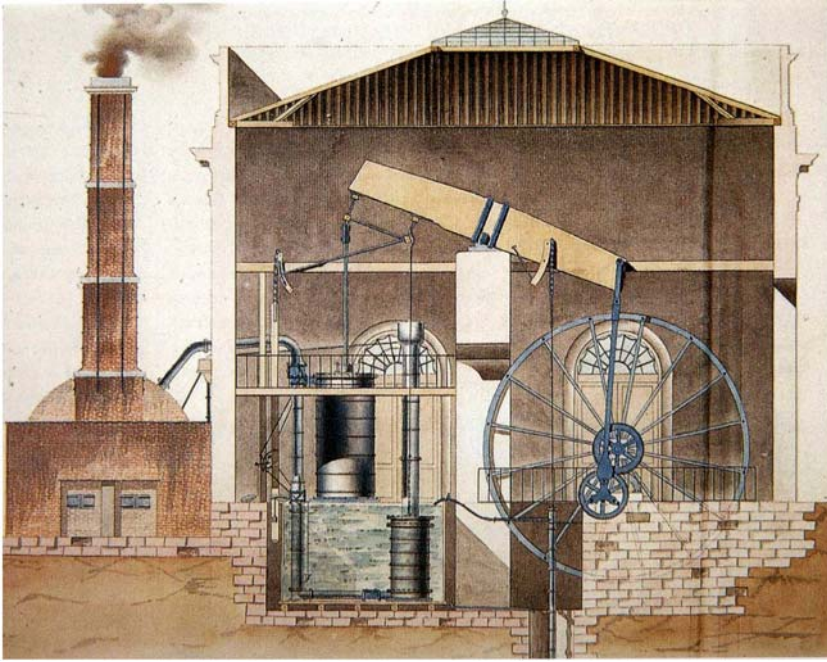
Watt's Double Acting Steam Engine: Drawing by Agustín de Betancourt (1788). The drawing shows the novel aspects of the machine, some of which were seen and others guessed by him.
